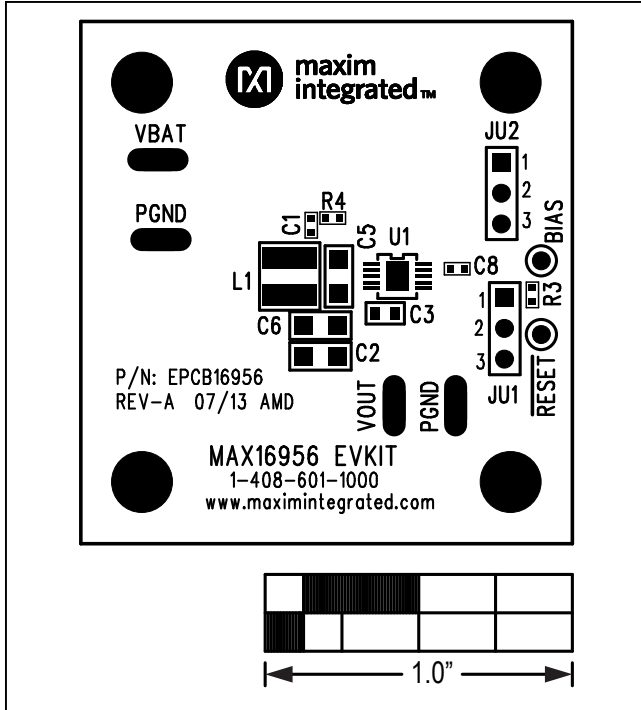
MAX16956 EV Kit Component Placement Guide—Component Side
